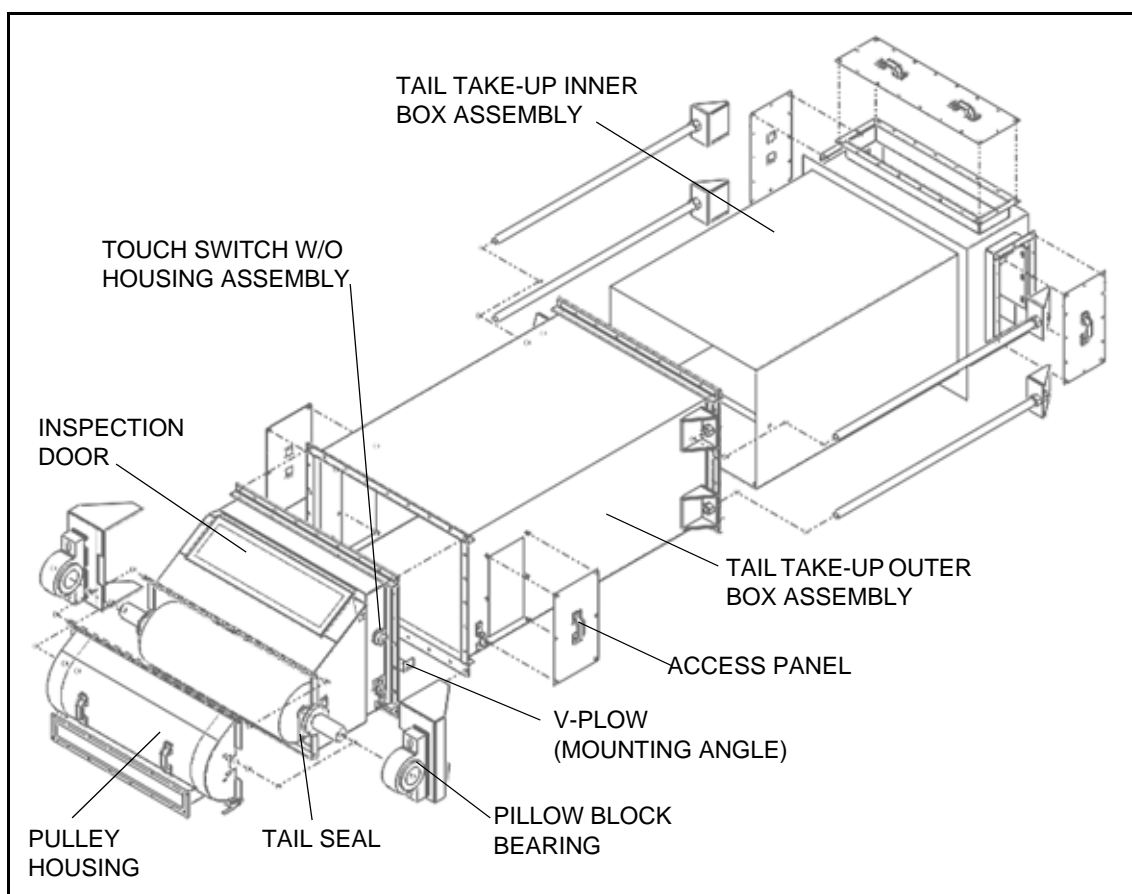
Exploded View of Tail Section with Screw Take-Up
